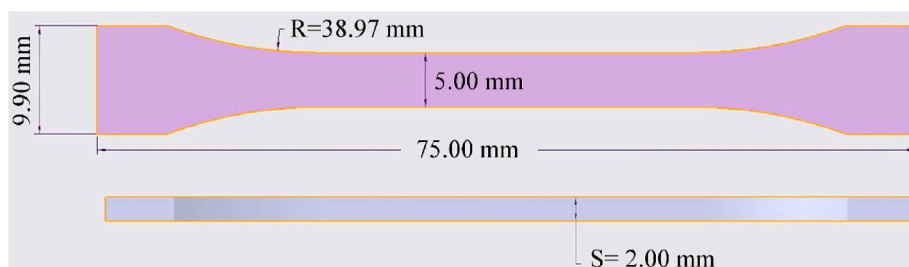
Geometry of the PP specimen manufactured by injection molding.
